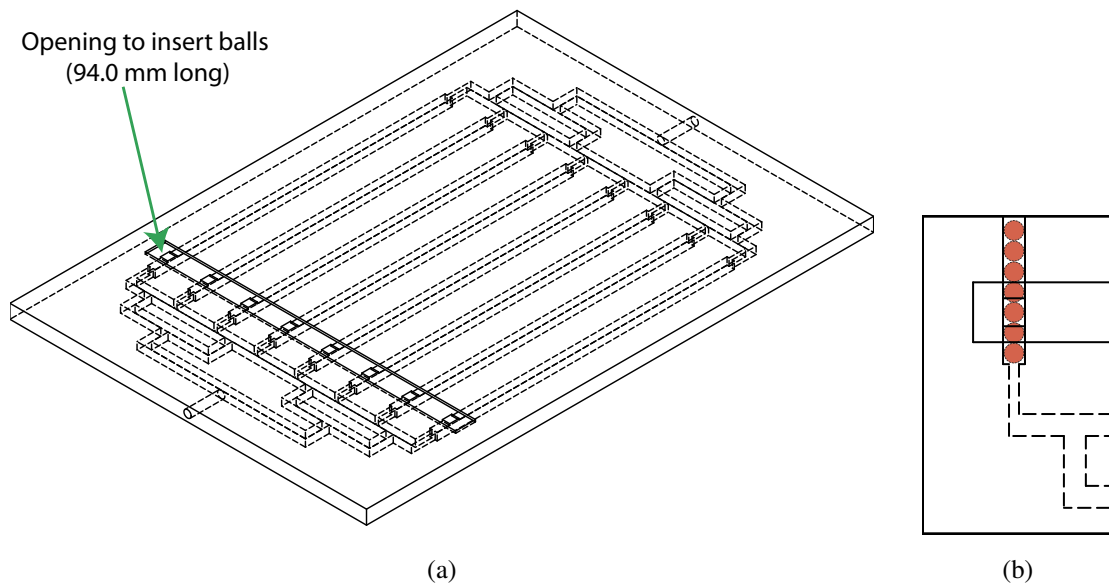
(a) Topology of a 3D printed substrate with 8 fluidic channels (b) Zoomed in view with balls inside one channel [Top View].
